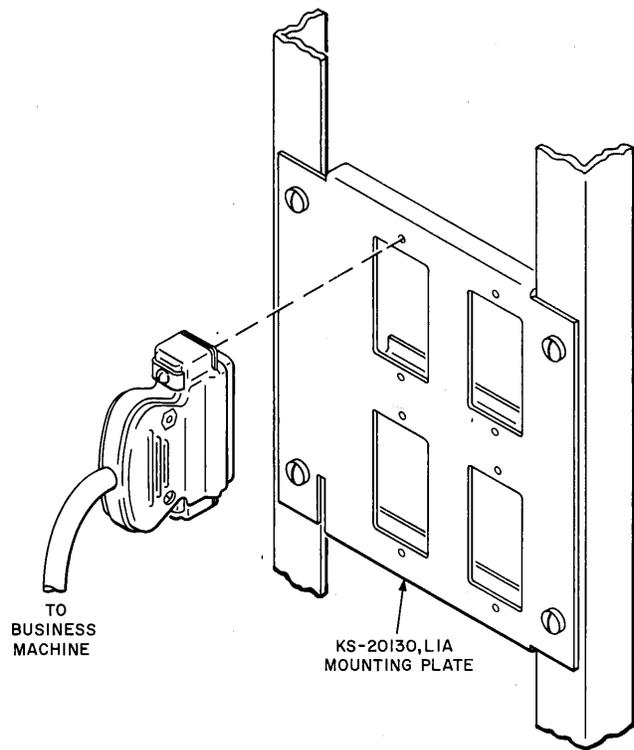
Customer Interface Cord Attached to KS-20130 LIA Mounting Plate, Front View
